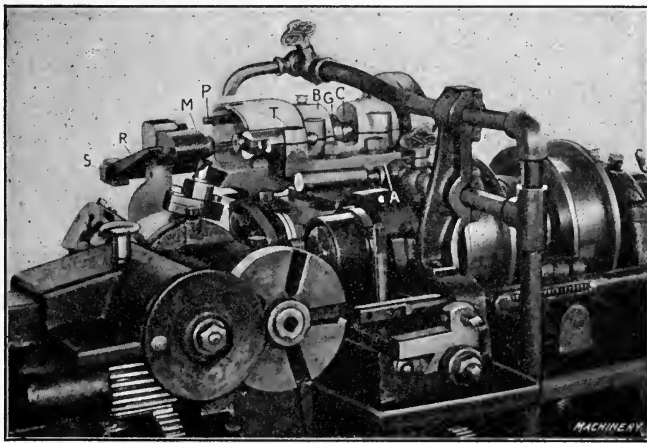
Rear View of the Burring Attachment applied to Brown & Sharpe Automatic Screw Machine
